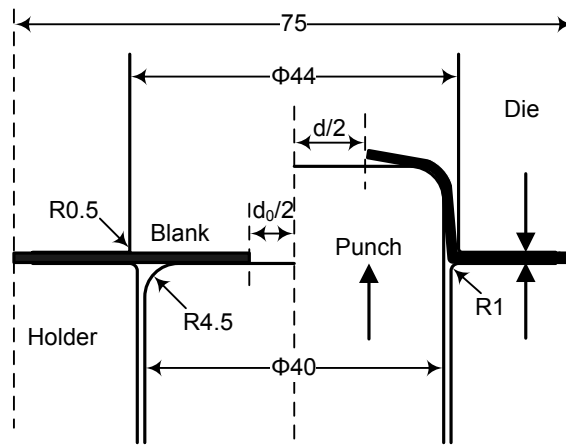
Experimental schematic of hole expansion test (dimension: mm).
